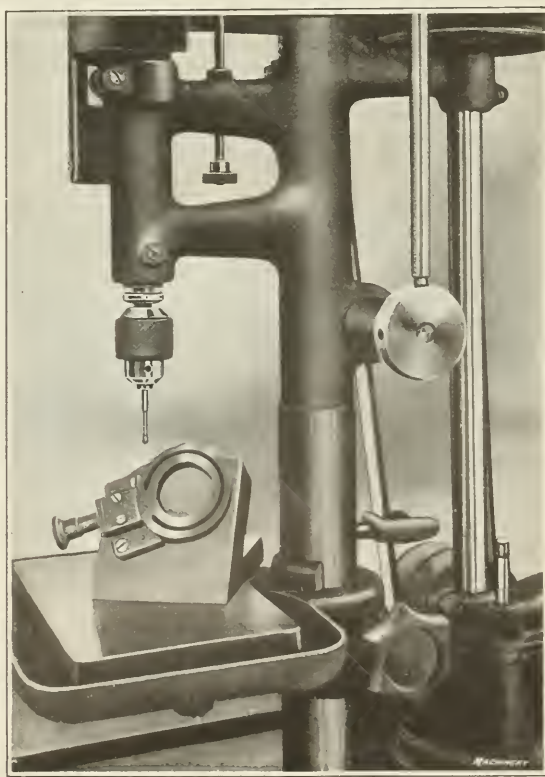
High-speed Machine for drilling and reaming Connecting Hole
